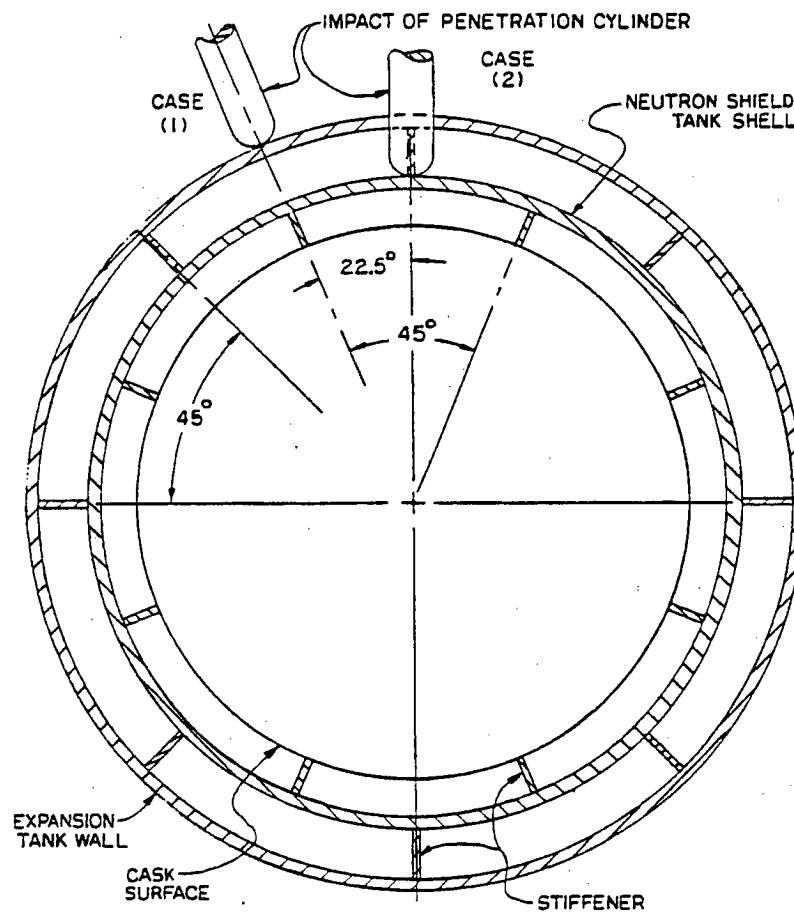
Impact of Penetration Cylinder on Neutron Shield Tank and Expansion Tank – Details for Analysis
